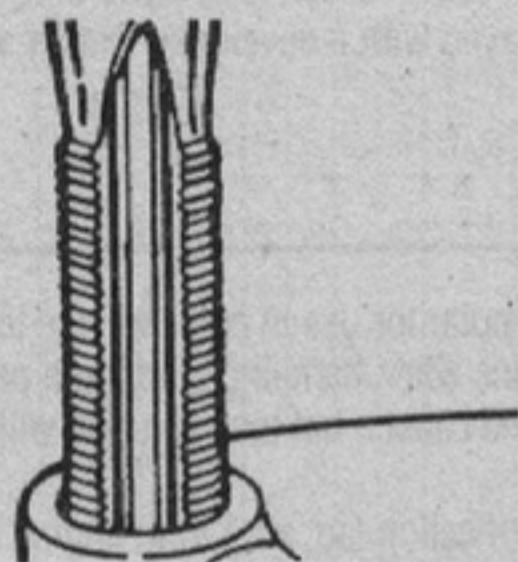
With the tap supplied, tap the hole to receive the thread insert. Keep the tap well oiled and back it out frequently to avoid clogging the threads
